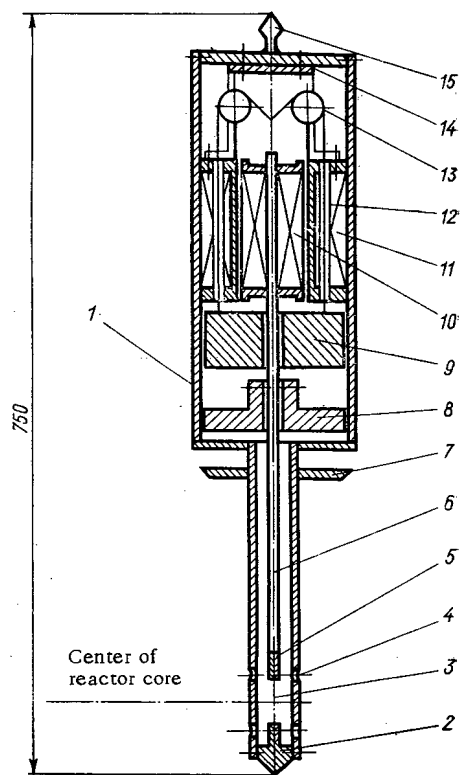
Design of capsule holding specimens for in-pile measurements of internal friction and shear modulus.
